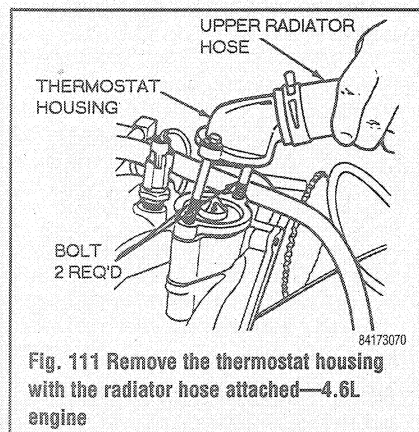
Remove the thermostat housing with the radiator hose attached—4.6L engine
